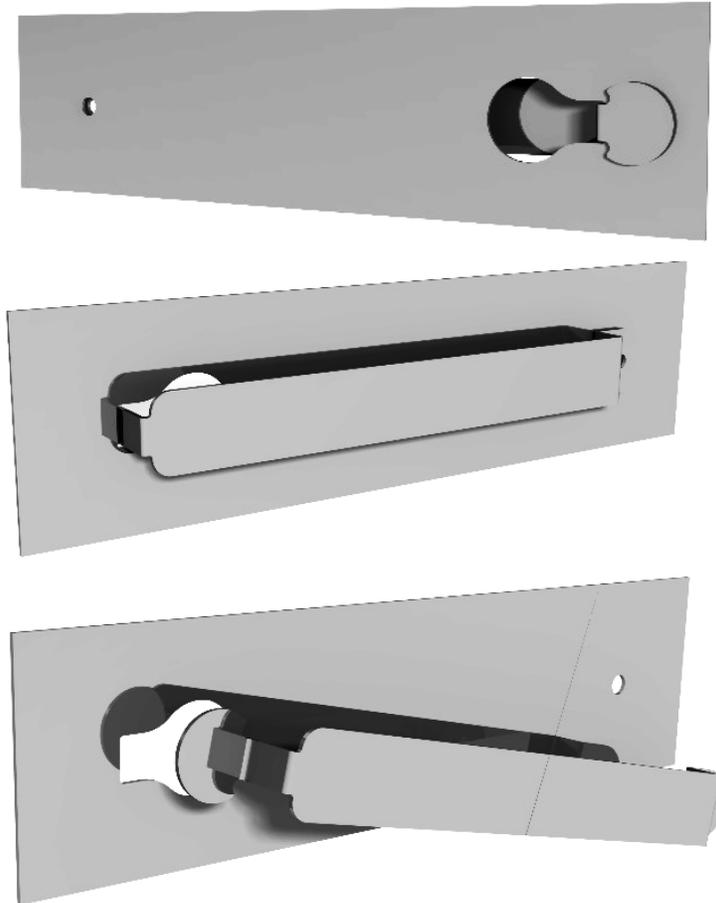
CAD model of rotational gas generator bracket and footprint.
